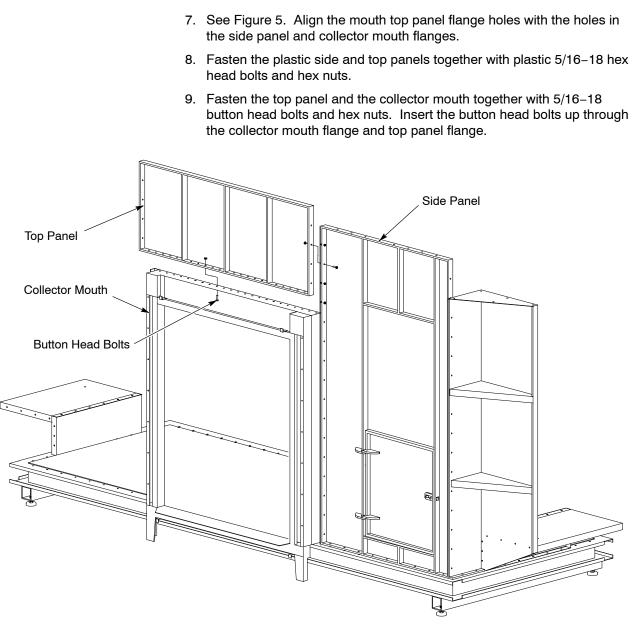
Securing Top Panels to Collector Mouth and Side Panels
